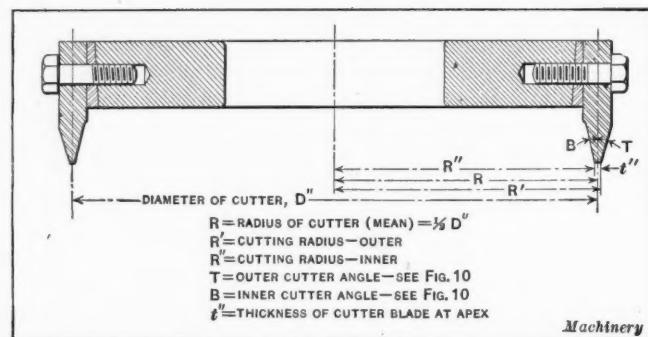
Cross-sectional View of Finishing Cutter used on Gleason Spiral Bevel Gear Generator
